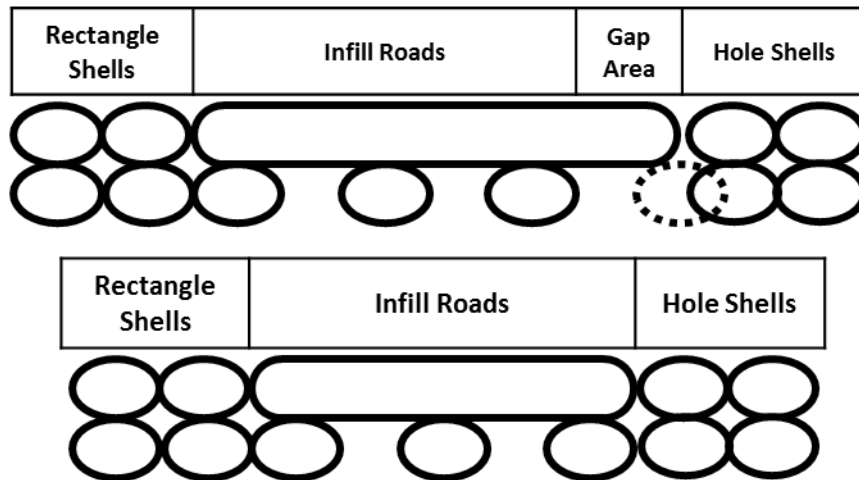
Sketch of actual and ideal part shape based on existing infill road geometry (16)
